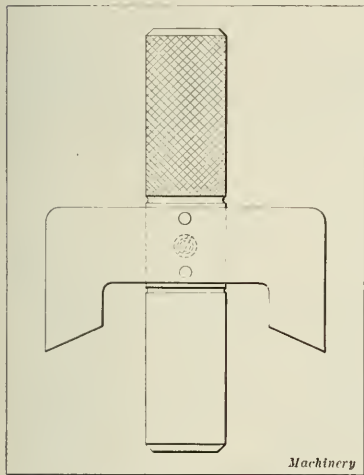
Combination Plug and Templet Gage for inspecting Bevel Gear Blanks
